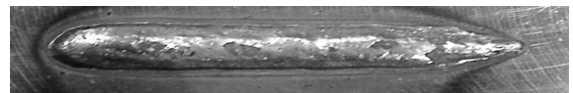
Weld bead appearance when applying normal cable wiring(200A)
